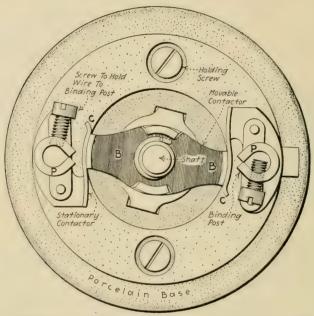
Single-pole, rotating-button, snap switch having end-contactor mechanism. (Switch closed, button and cover removed.)
